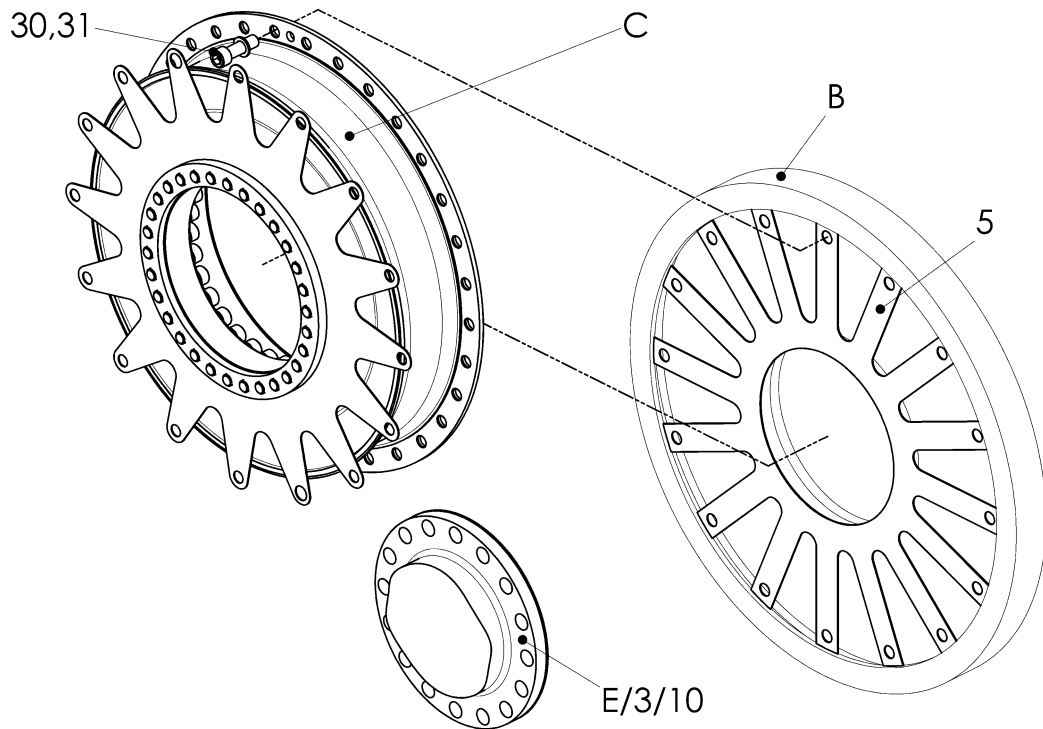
Mounting the pre-mounted rubber element assembly (C) and sheet to the flywheel
